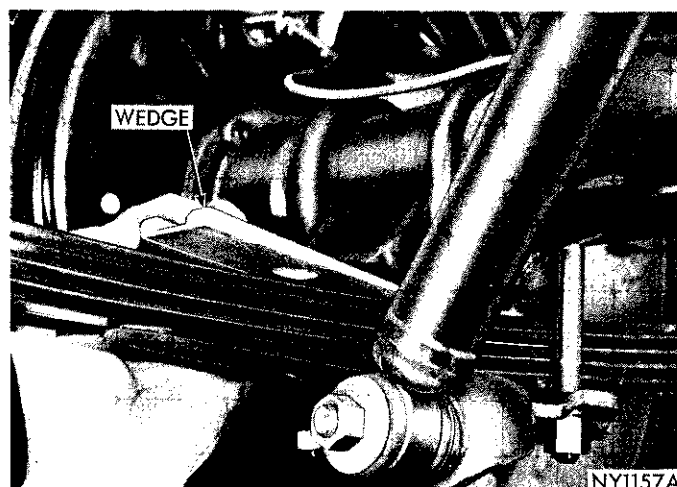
Tapered Wedge Location (Rear Universal Joint Angle Correction)
